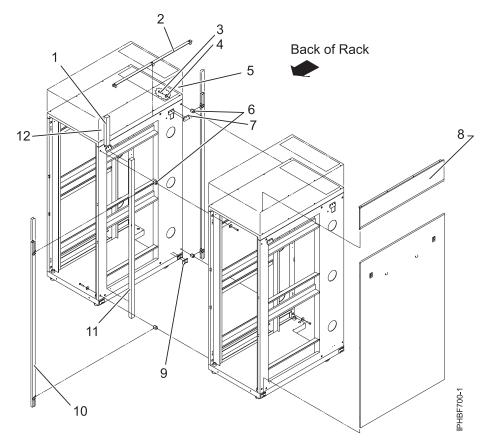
Removing the side panels, Z and J brackets, and installing standoffs and long foam to connect multiple racks.
